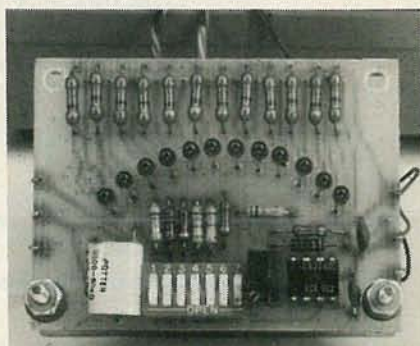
FRONT-VIEW PHOTO of the front PC board. The switch must be set for the desired calibration before the cabinet is buttoned up.
